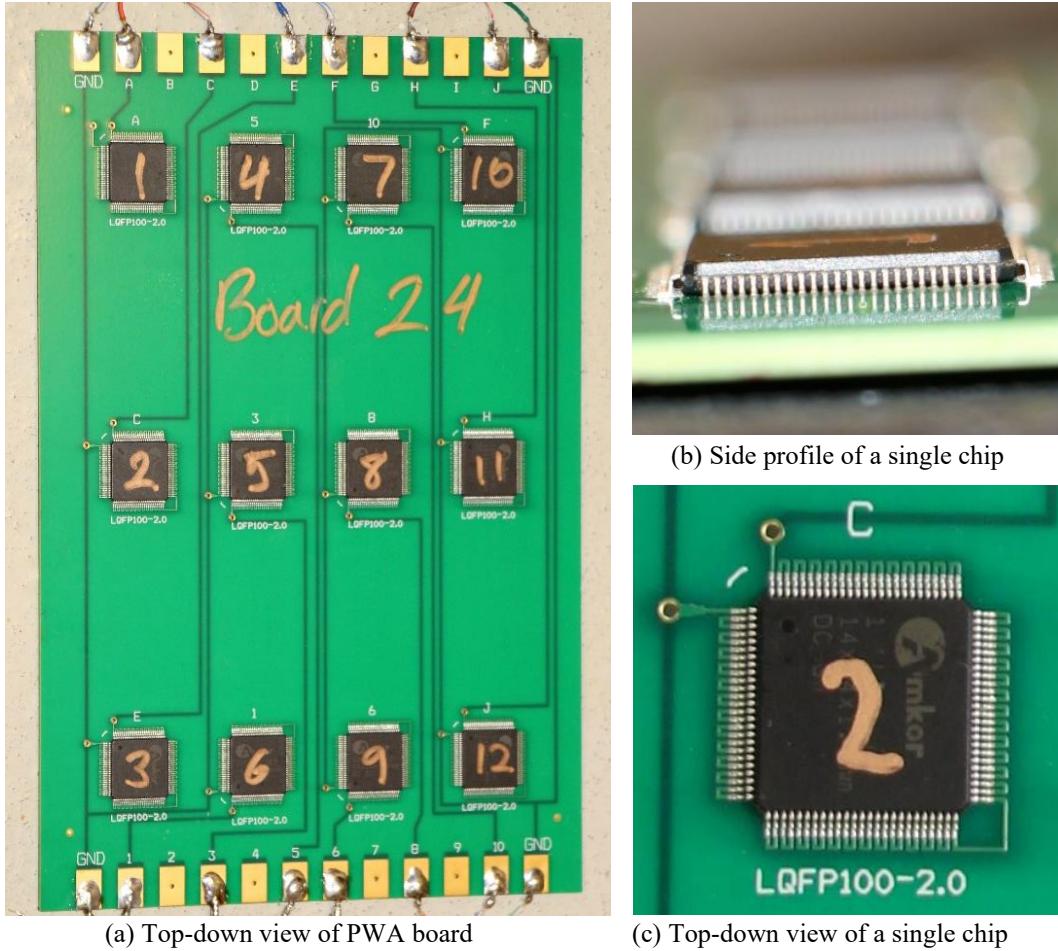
printed wiring assembly (PWA) board used for sequential and simultaneous testing.
